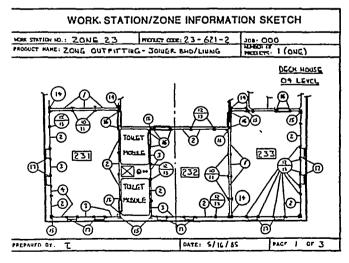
Deckhouse zone information for joiner lining and bulkheads
